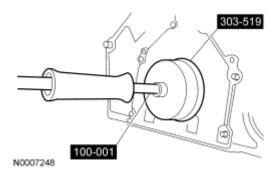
Removing Crankshaft Rear Seal Courtesy of FORD MOTOR CO.
